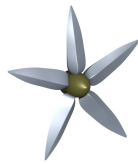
Side View of CAD Drawing of High Lift Propeller.
